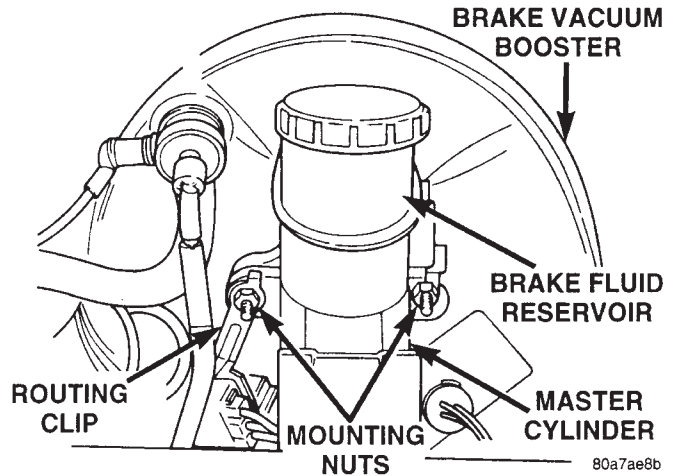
Master Cylinder Mounting To Vacuum Booster
